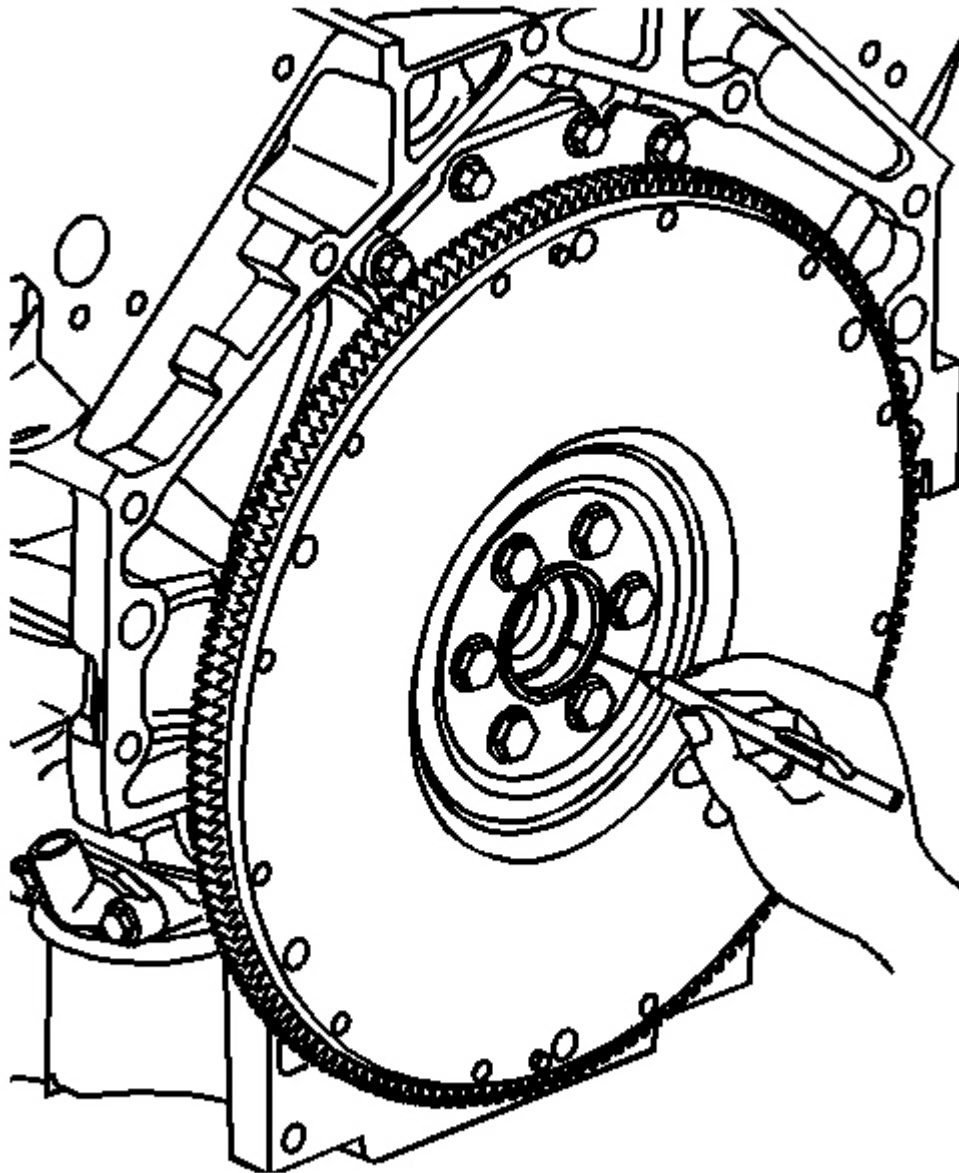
Mark End Of Crankshaft & Manual Transmission Flywheel
